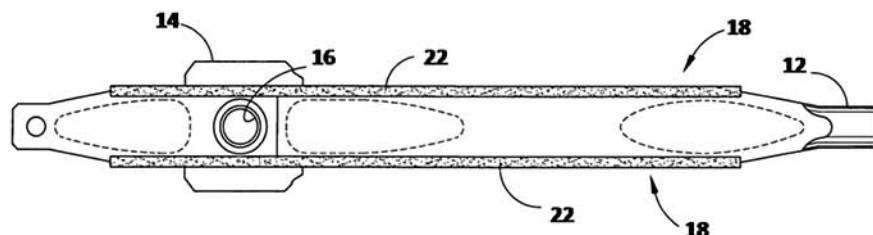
Aircraft wheel rotor drive (12 end extension, 14 outboard engagement portion, 16 bolt hole opening, 18 side areas, 22 WC-Co composition) [128].
